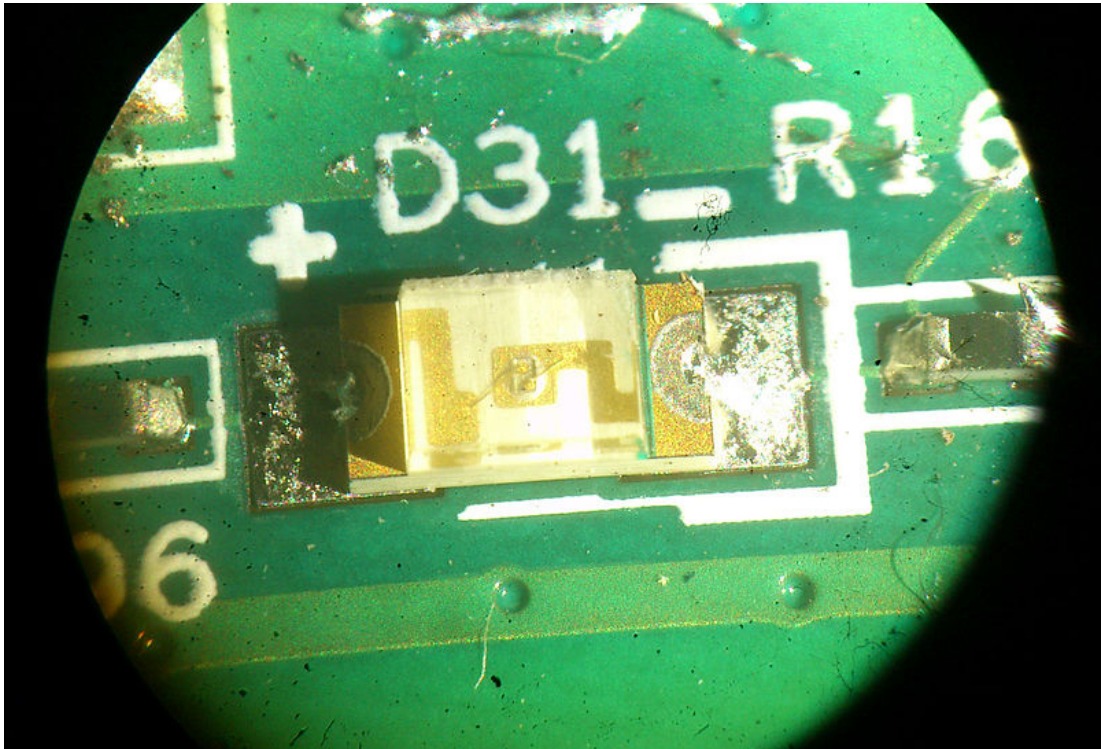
ChipLED mounted on a router printed circuit board (Sdk16420, 2020).
